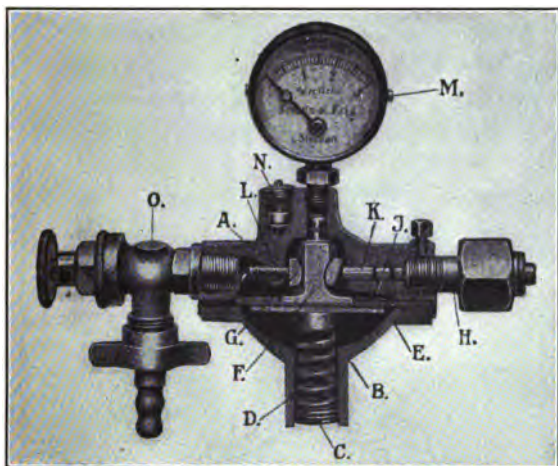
Cross section showing details of construction of pressure-reducing valve.
